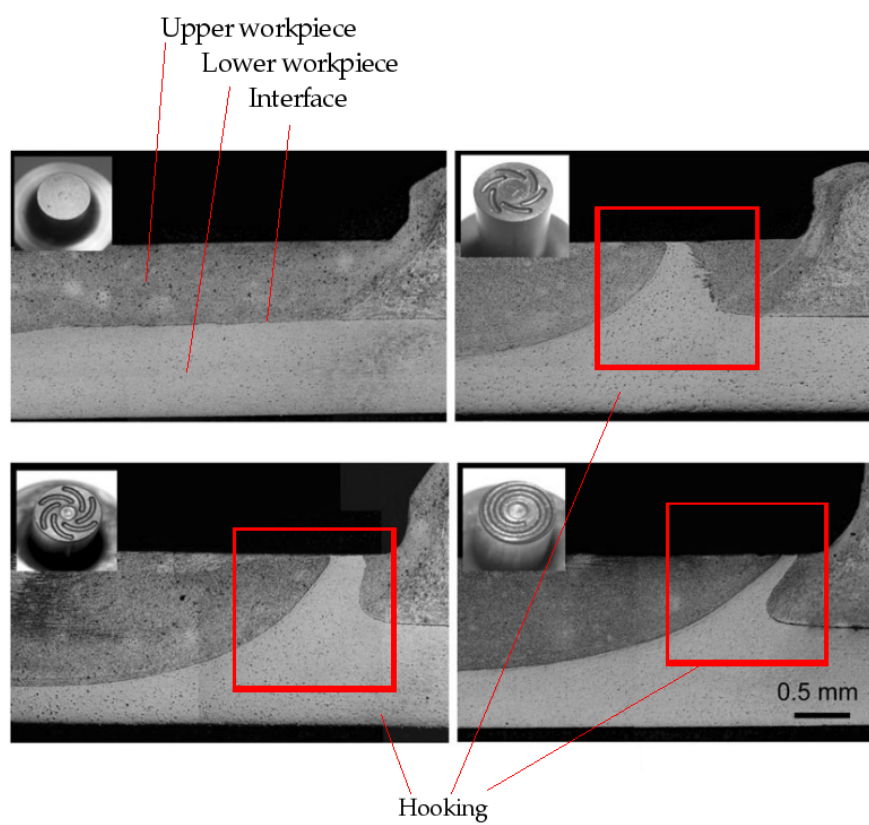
Hooking behaviour for 4 tool types under identical welding conditions
